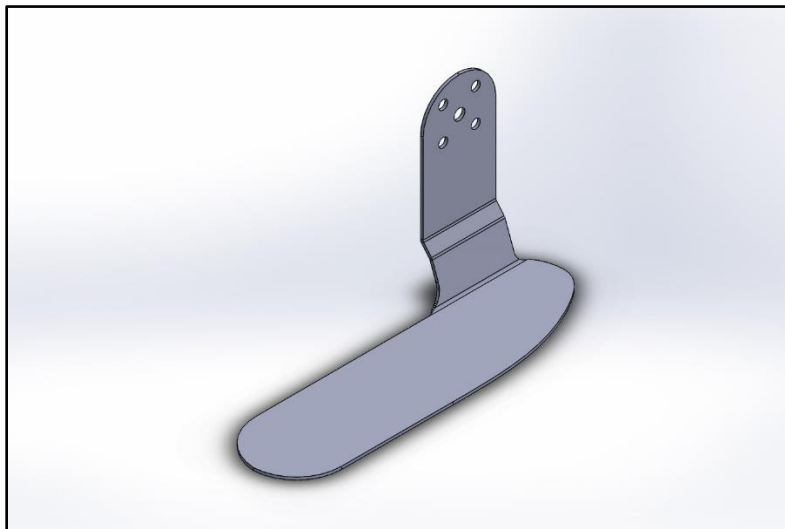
Insole bracket. The four bolt pattern attaches to the torque sensor. The central hole is for the shoulder bolt that the ankle assembly attaches to.
